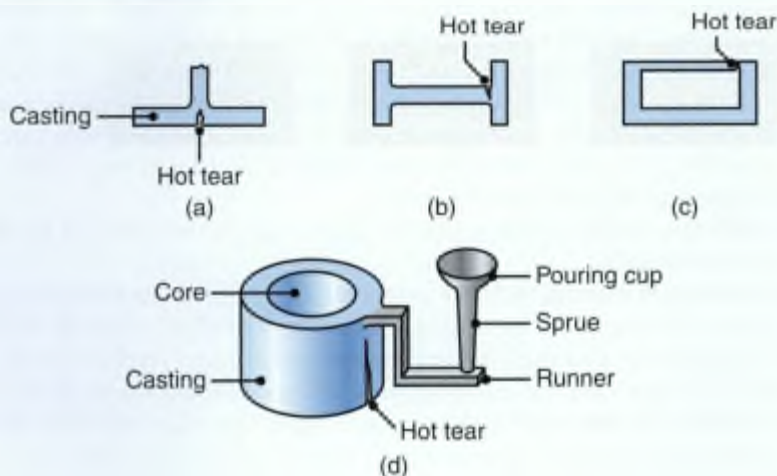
Examples of hot tears in castings. These defects occur because the casting cannot shrink freely during cooling, owing to constraints in various portions of the molds and cores. Exothermic (heat-producing) compounds may be used (as exothermic padding) to control cooling at critical sections to avoid hot tearing.
